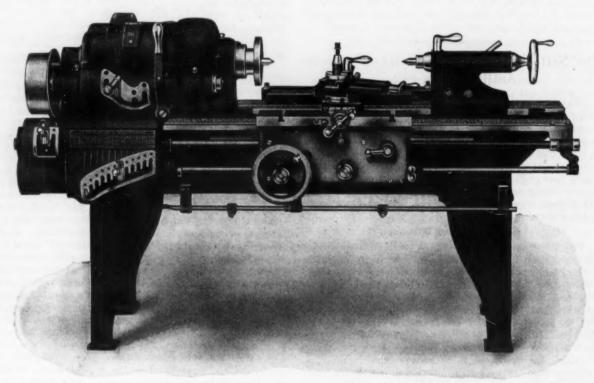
A 16-Inch Hendey Lathe with the New Pattern All Geared Head.
